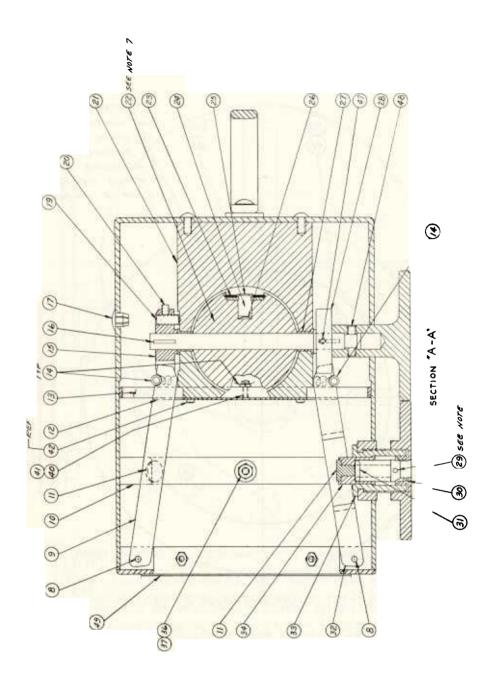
Radiation Standard Assembly, Mechanical Detai¹ (Part 2 of 4)
